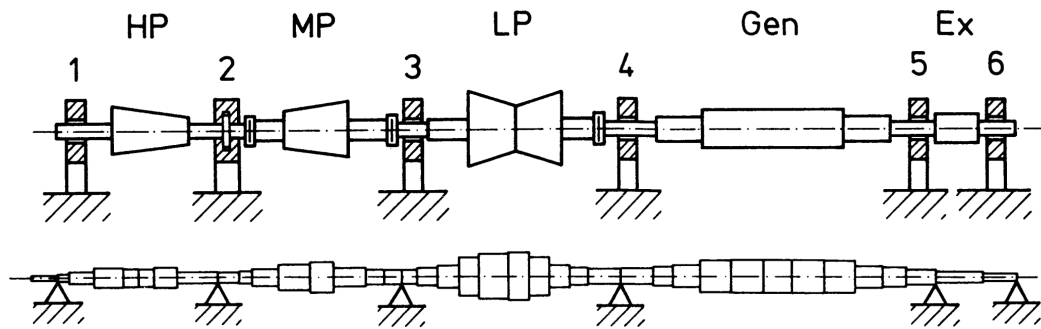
Schematic of steam turbine generator shaft train with bearings and pedestals. [8].
